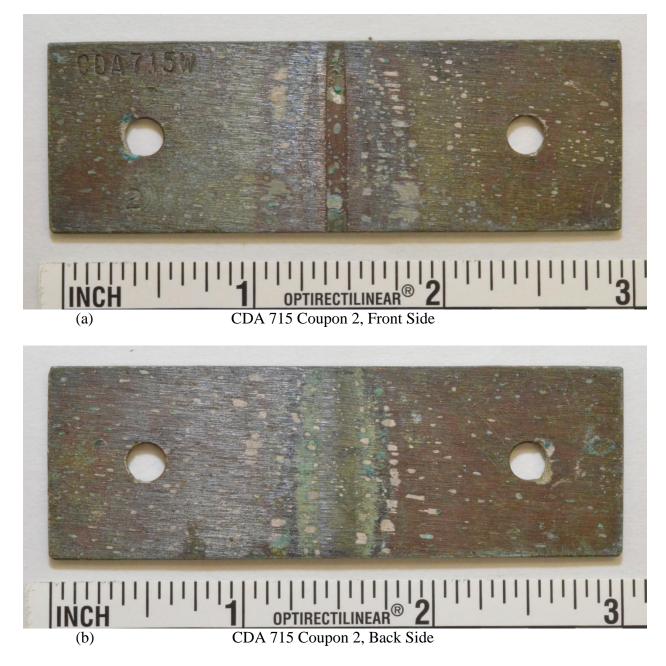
Photographs of CDA 715 coupon 2 (a) front and (b) back side after a 6 month corrosion test.
